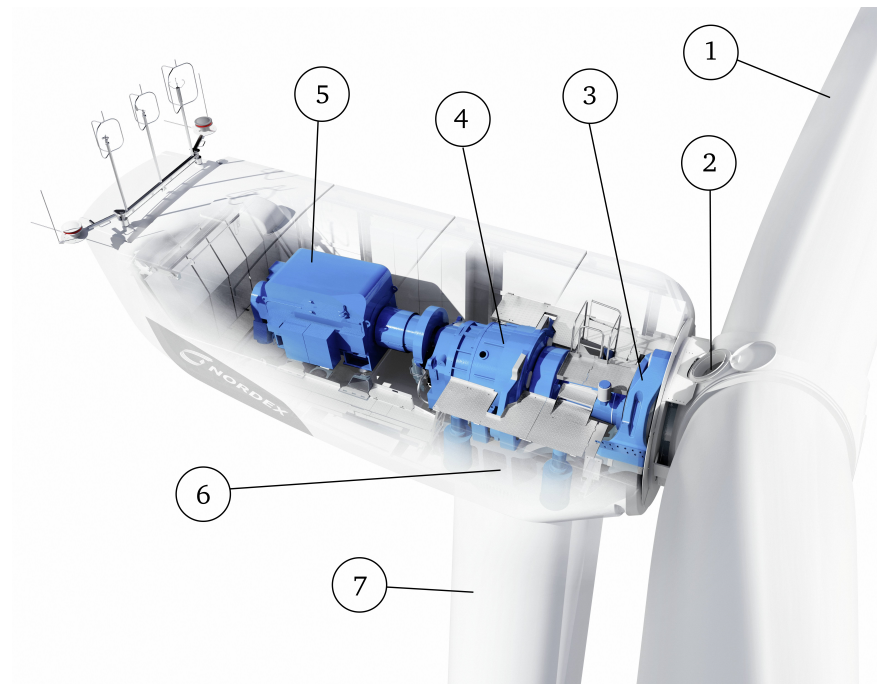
Structure of a modern wind turbine, showing major assemblies: (1) Blades; (2) hub and pitch mechanism; (3) main bearing; (4) gearbox; (5) generator; (6) yaw drive; (7) tower. Image courtesy of Nordex SE
